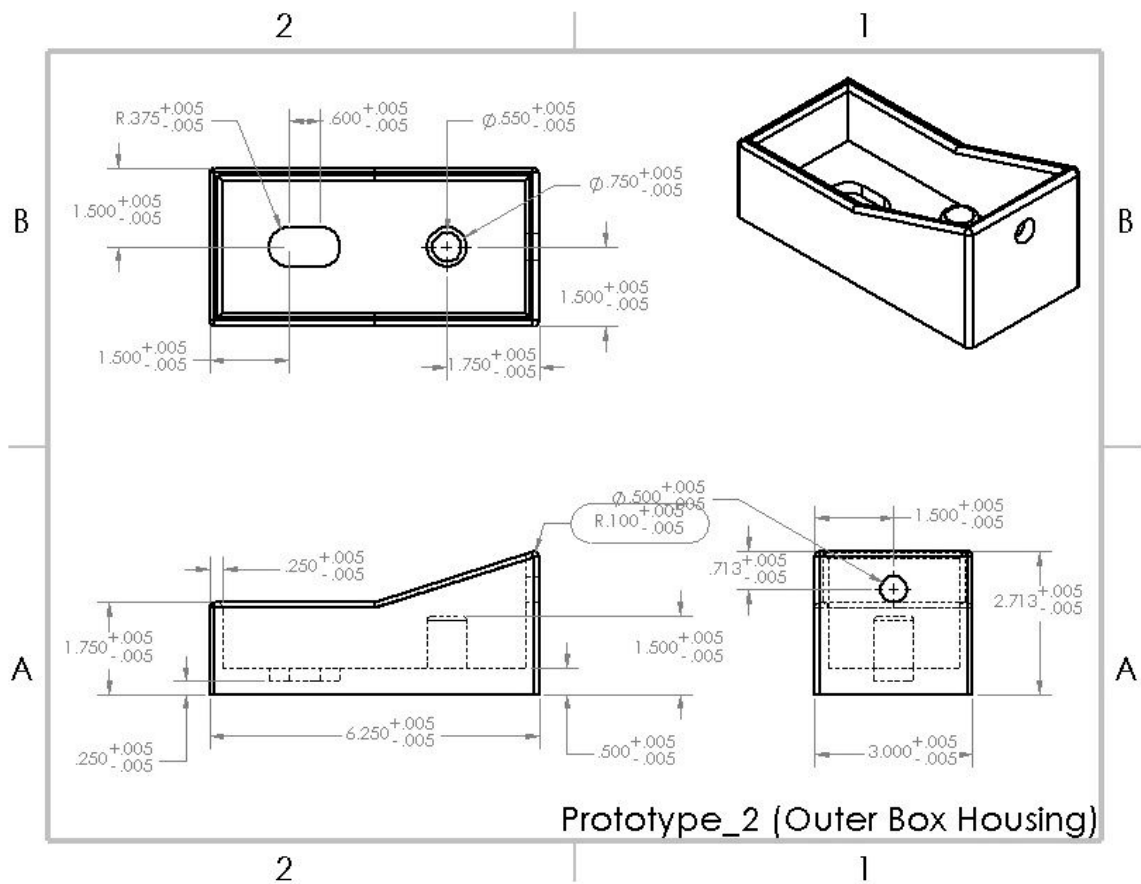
Solidworks 2D Prototype Outer Box Housing Drawing
